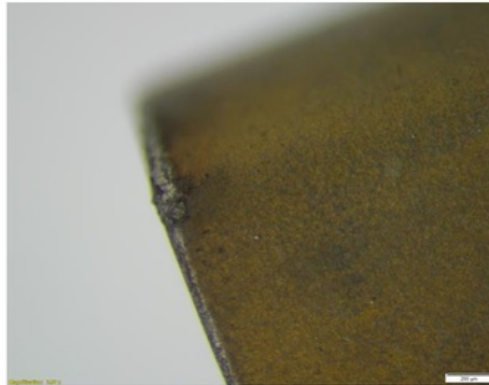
Sandvik DNMG tungsten after 8 machining passes.
